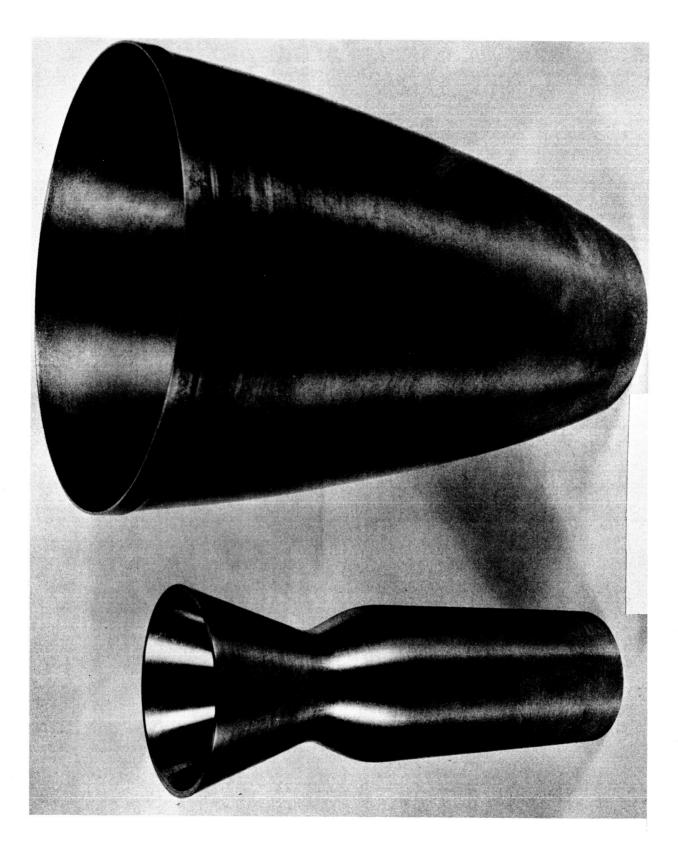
Chamber and Nozzle Extension for 100-lb Columbium Engine Prior to Electron Beam Welding
